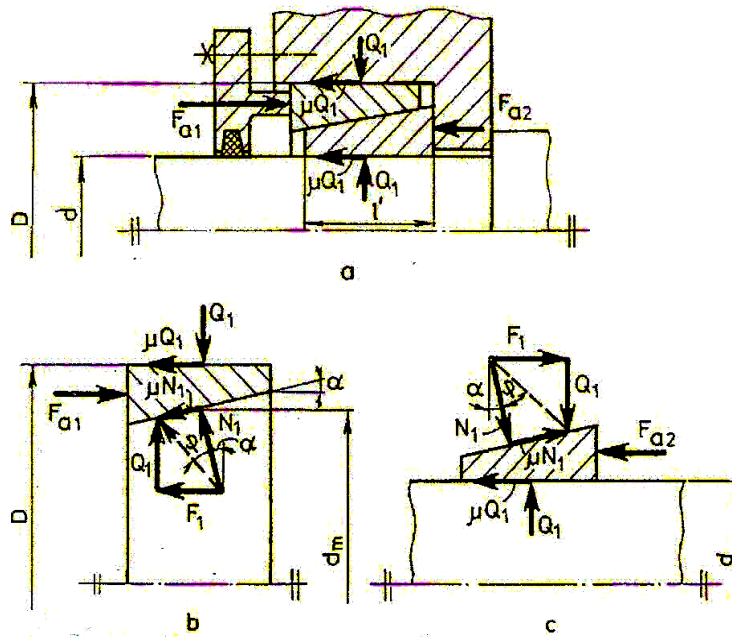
Some geometric elements of assembly with on pair of tapered ring
